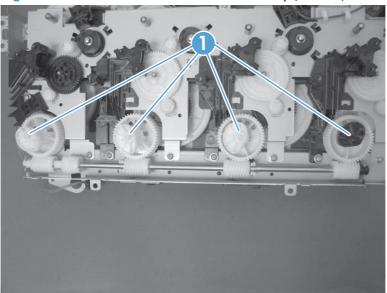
Reinstall the main drive assembly (2 of 11)
